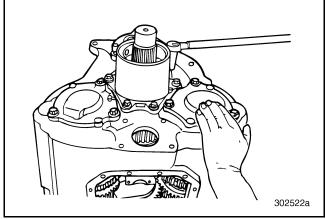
Tightening Output Housing Capscrews (T313L21/T318L21 Shown)
